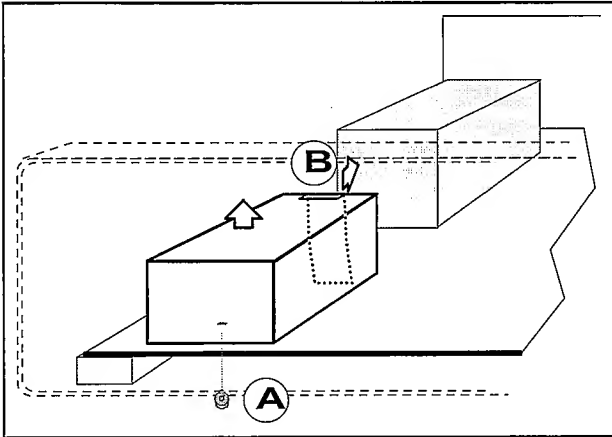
A clip and a screw hold the oven oscillators in place.
